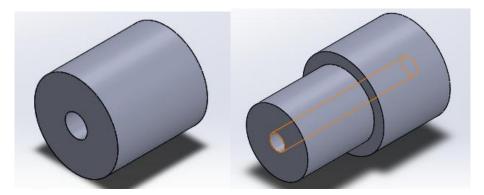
Rotational smooth (left) and stepped to one end (right) part with internal no shape element
